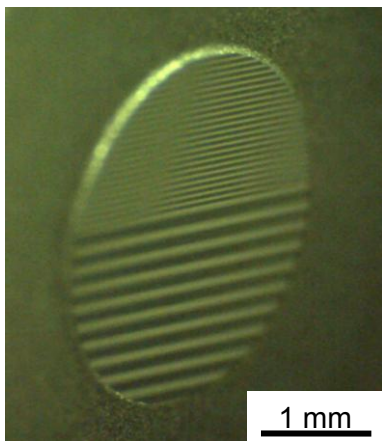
Microscope image of a micro-structure ground in tungsten carbide with the PCD grinding wheel shown in FIGURE 2.
